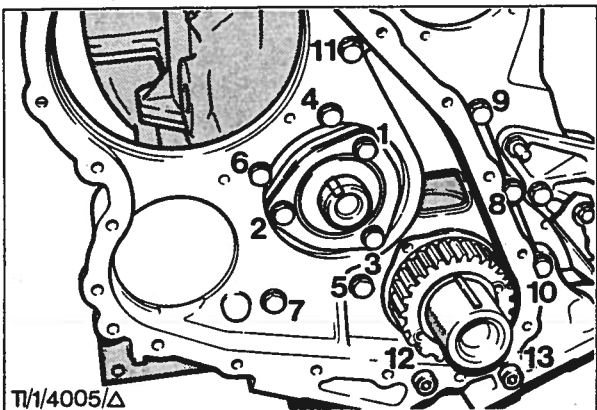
Timing Gear Housing Bolt Tightening Sequence - 4 Cylinder Engines
